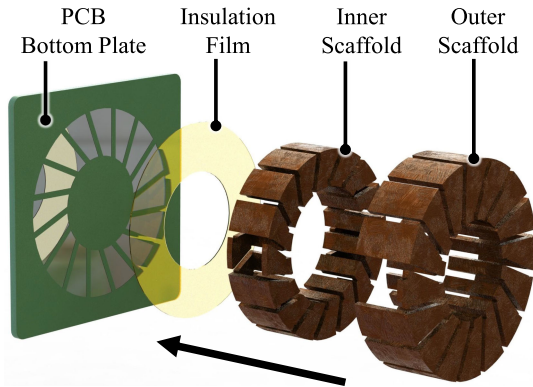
Fabrication diagram of the toroid-in-toroid transformer structure. The inner winding is one solid piece, while the outer winding is single-turn pieces soldered onto the PCB. The windings are spaced and insulated from one another to maintain galvanic isolation.
